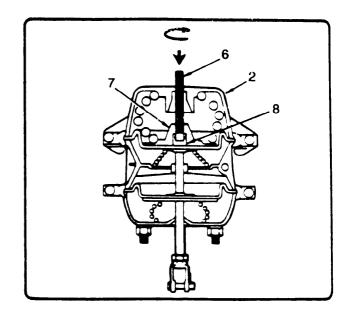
Trailer Brake Air Chamber Assembly (ARMY)
